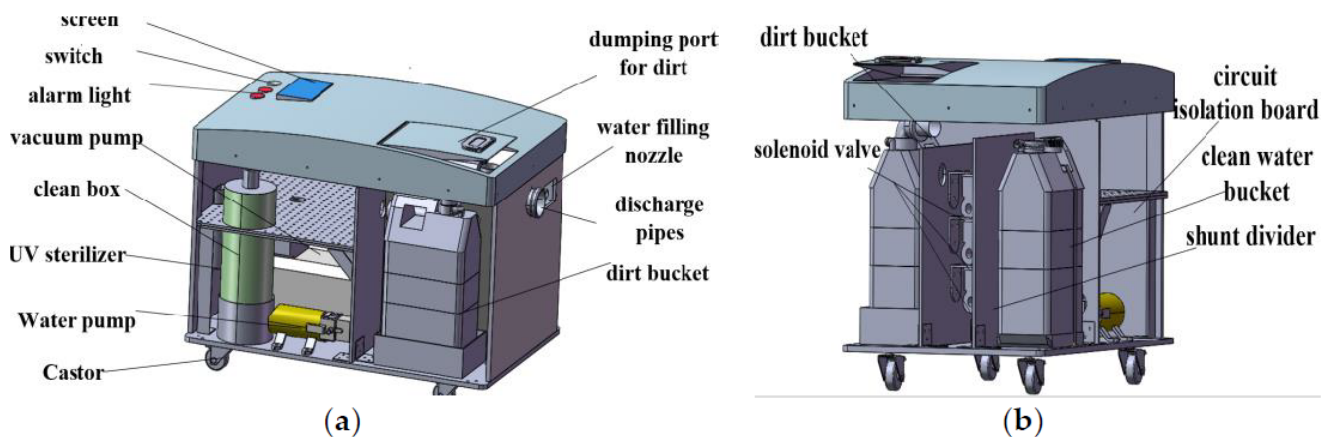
Mechanical structure of main engine. (a) Side view; (b) Front side view.
